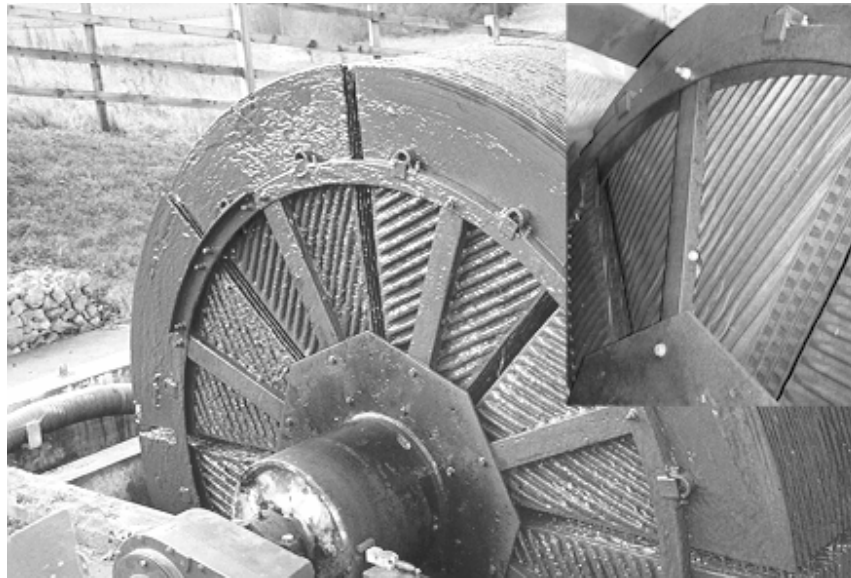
Fracture support structure; Insert shows fracture at different rotational position.
